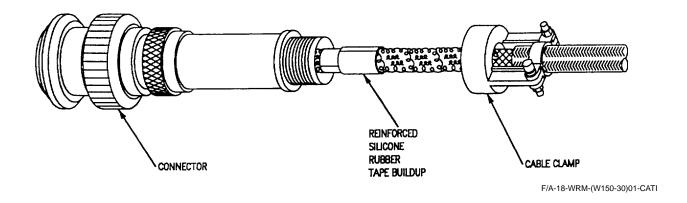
Reinforced Silicone Rubber Tape Buildup to Fill Clamp Assembly
